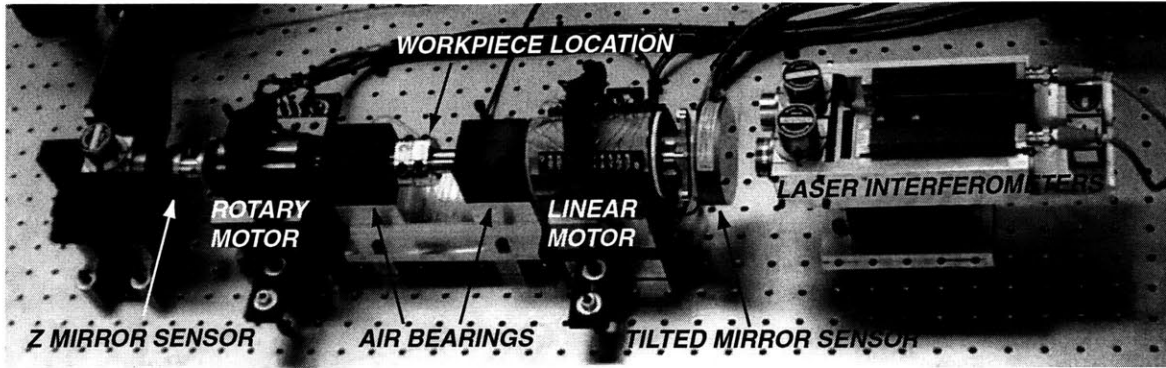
The prototype z - θ axis consists of a central shaft riding in two cylindrical air bearings. The frameless rotary motor on the left made from commercially available parts generates torque; the custom-built tubular linear motor on the right generates force. On the far left is a 1 inch (2.54 cm) diameter mirror for z measurement, and on the far right is a 3 inch (7.62 cm) diameter, slightly tilted mirror for θ measurement.
